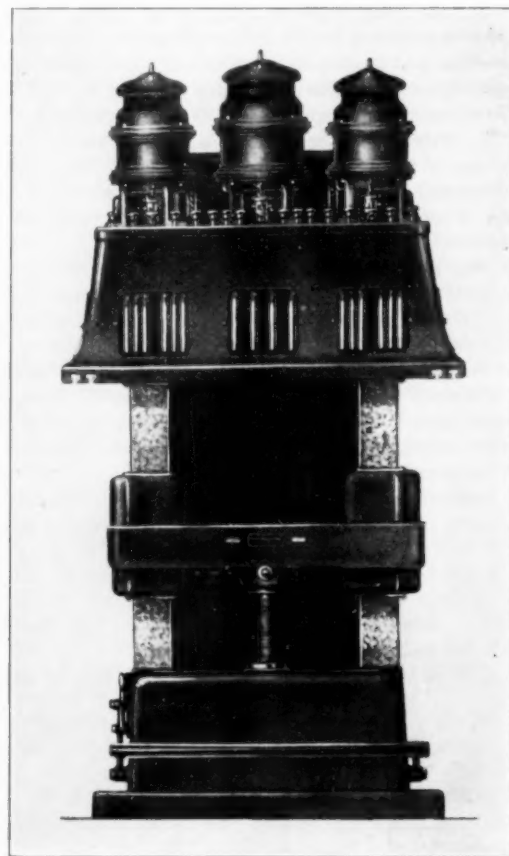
MULTIPLE-SPINDLE DRILL, FRONT VIEW
